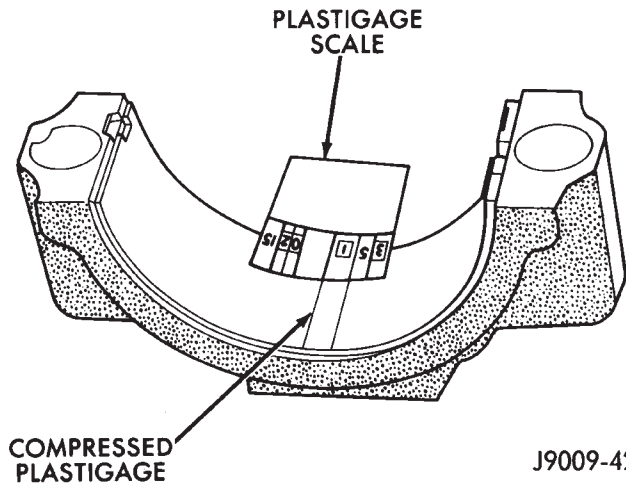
Measuring Bearing Clearance with Plastigage needed to provide the correct clearance (refer to Connecting Rod Bearing Fitting Chart).
